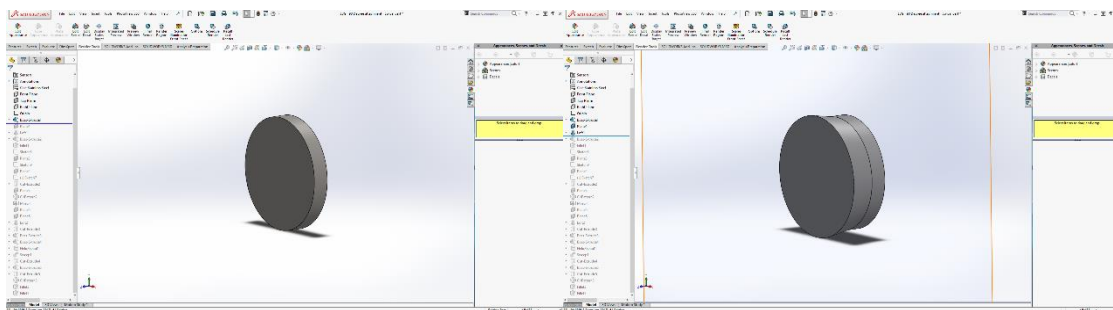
AC901616: CAD Drawing (Stages 5 & 6)
